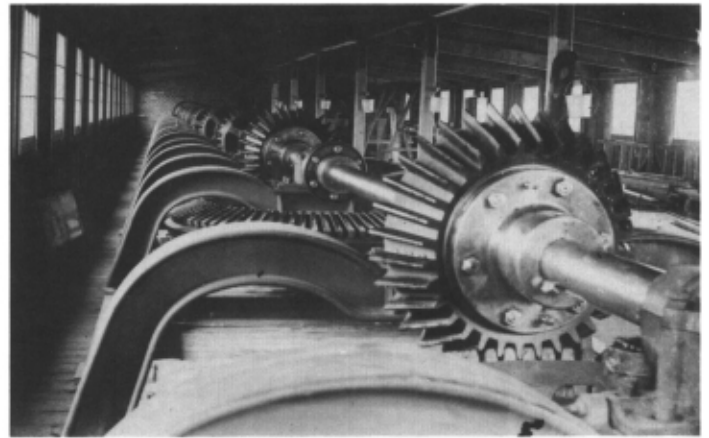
150 Ft. Generator Drive Shaft and Bevel Gearing from Turbines - 1898
